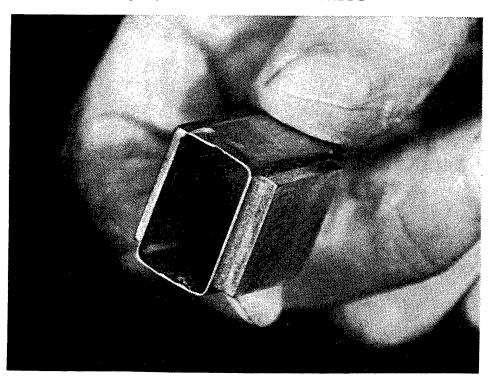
Fabrication Test Specimen of Pumping Section of VCLCP
